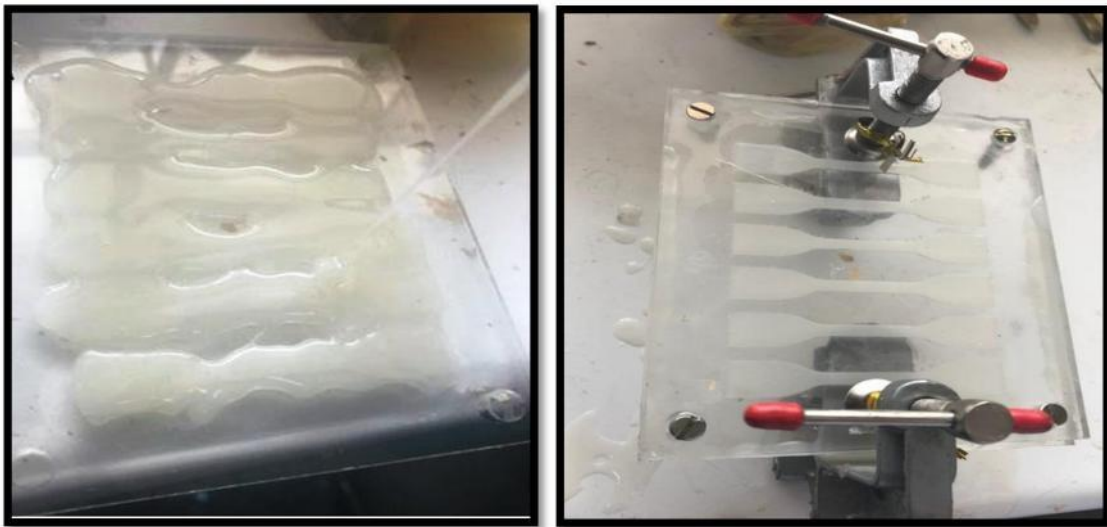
(A) Silicone pouring, (B) Mold securing.
